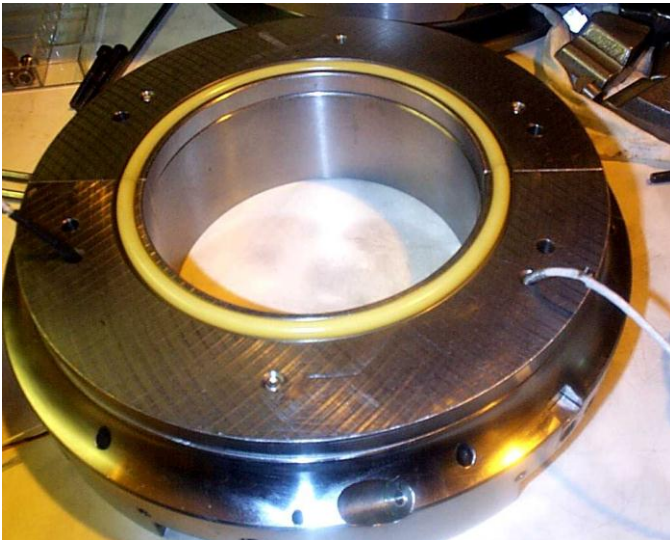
Assembled Bottom View Showing the O-Ring Design.
